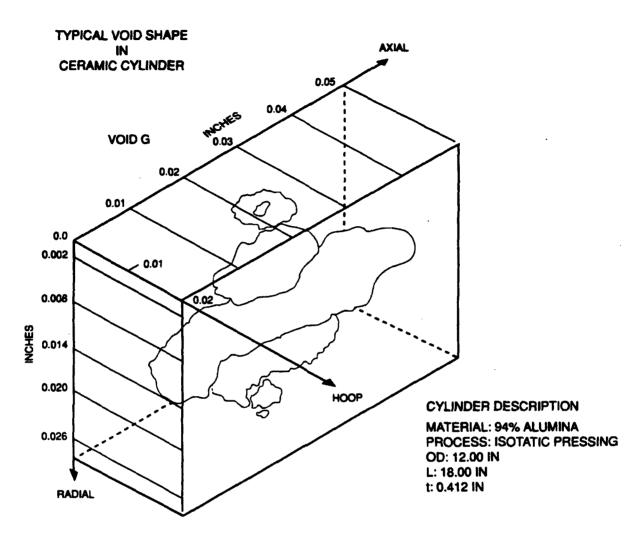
Three-dimensional reconstruction of a typical flaw on the basis of cross section images uncovered during successive passes of the grinding wheel. Note that the irregularity of the flaw shape makes it impossible to analyze its crack initiation potential by analytical approaches of fracture mechanics.
